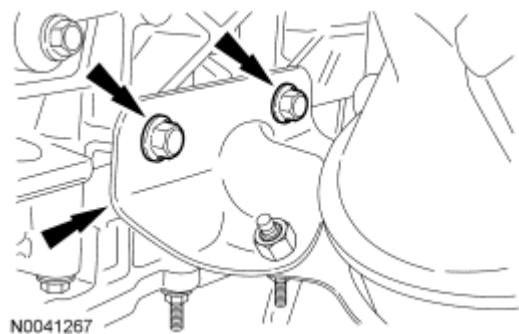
Locating Catalytic Converter Bracket Assembly Bolts
